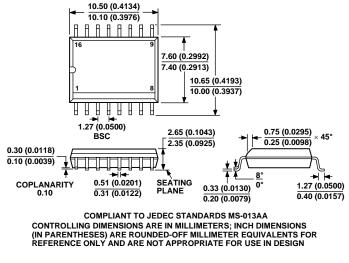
16-Lead Standard Small Outline Package [SOIC] Wide Body (RW-16) Dimension shown in millimeters (inches)
